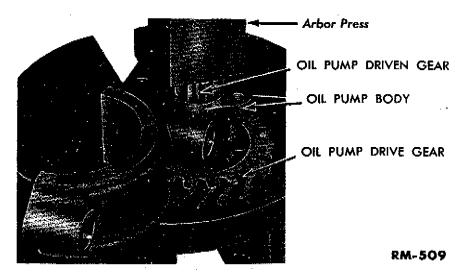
Pressing Oil Pump Driven Gear Onto Oil Pump
